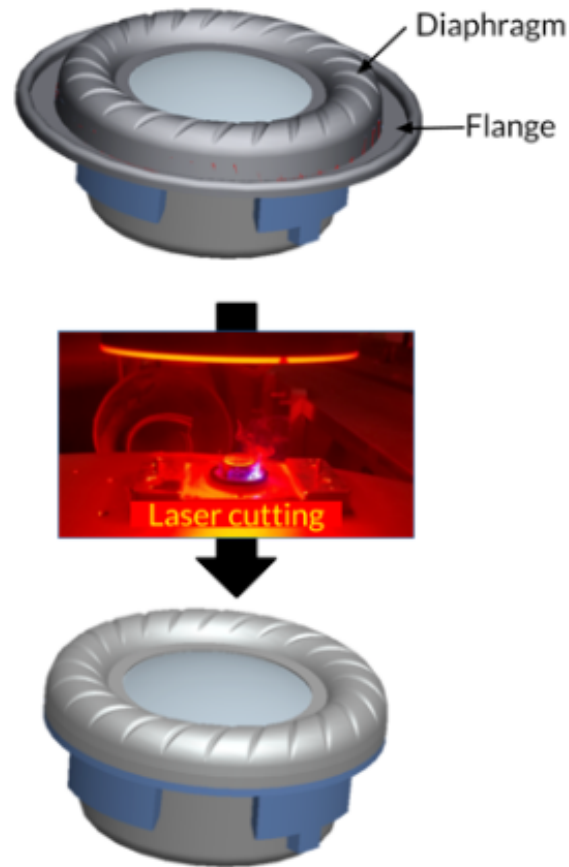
Laser-cutting to remove the flange of the diaphragm
